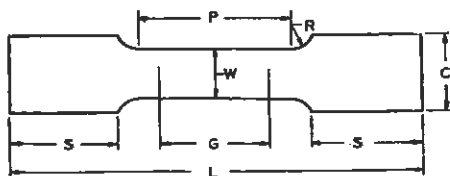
Flat Tension-test Specimen for Material  $3/8$  Inch Thick and under
